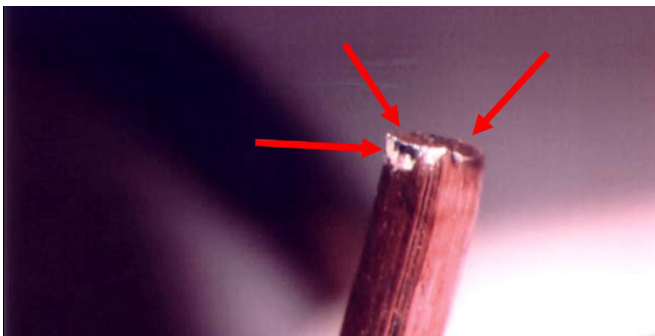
C: Copper wire cut by stripper/cutter (bypass) shear tool. Arrows point to anvil, fracture, and shear cutting zones (L to R)
